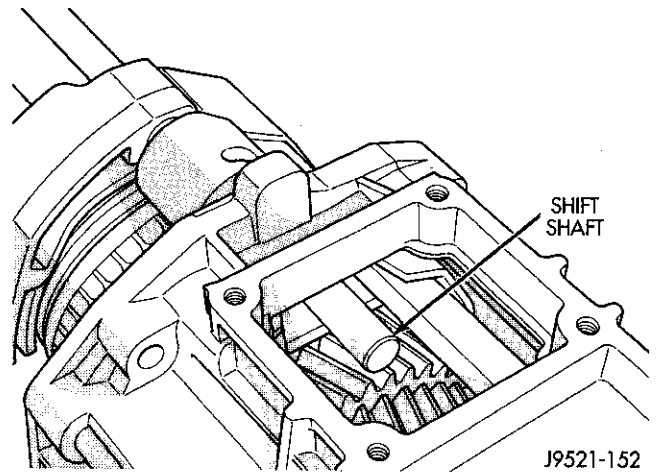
Inserting Shaft Into Lever Opening In Housing
